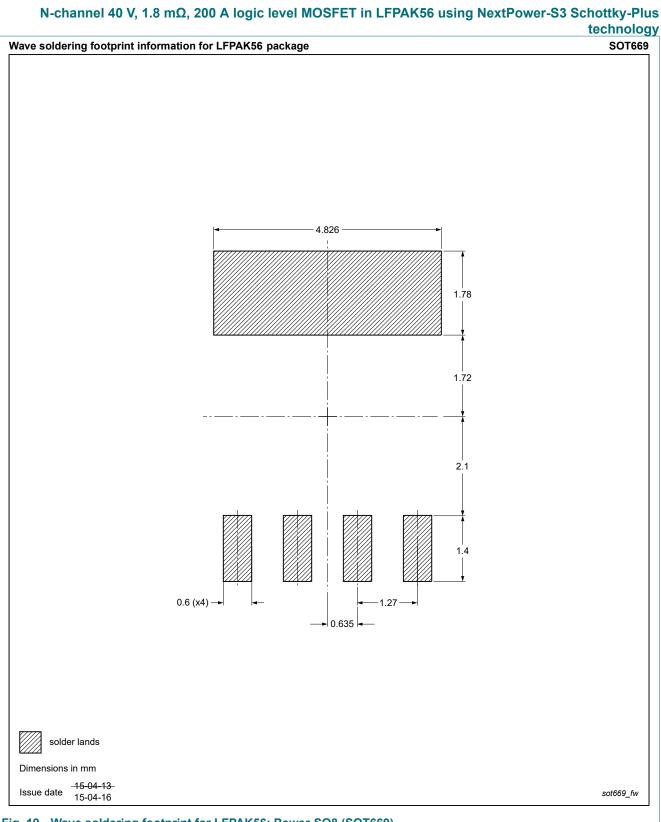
Wave soldering footprint for LFPAK56; Power-SO8 (SOT669)
